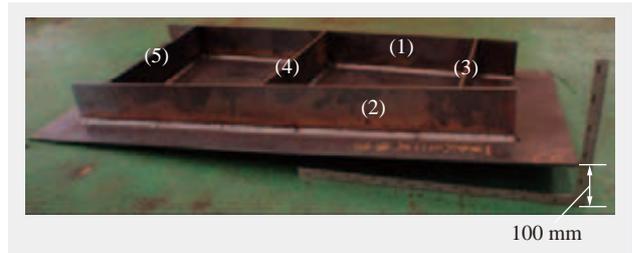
Welding Structure Used for Experimental Testing.
